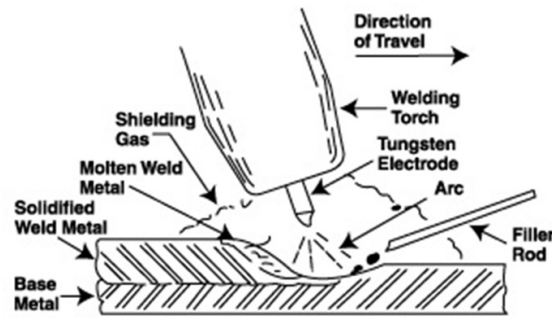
Gas Tungsten Arc Welding process [5]
